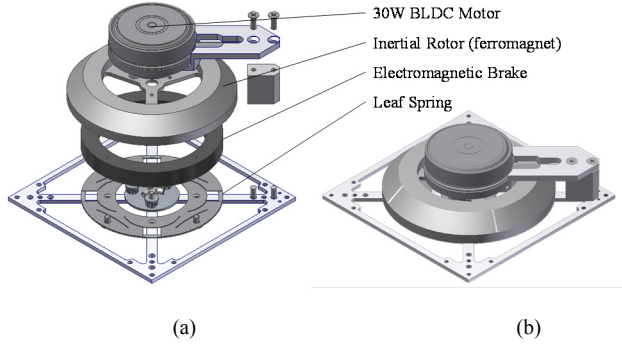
Configuration of E-M based on our wheel braking unit: (a) components, (b) as assembled.
